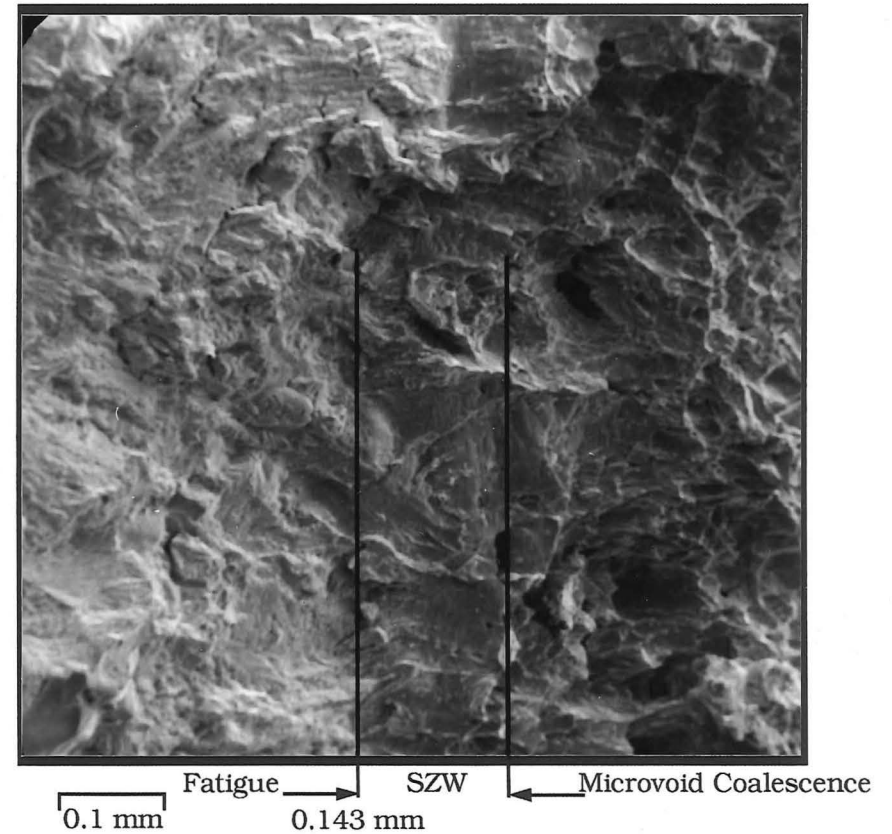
Fracture surface of LD10 tested at +45 °C ( x140, tilt 45° ).
